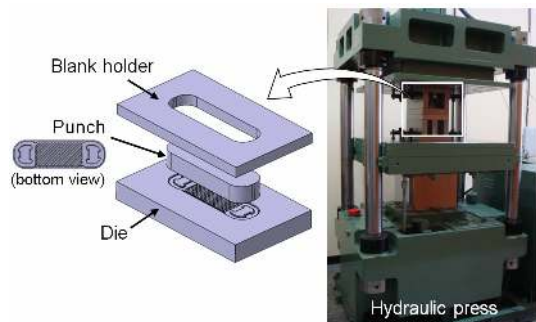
Experimental setup of a rig for the stamping test, and the shapes of molds are punch, die, and blank holder.
